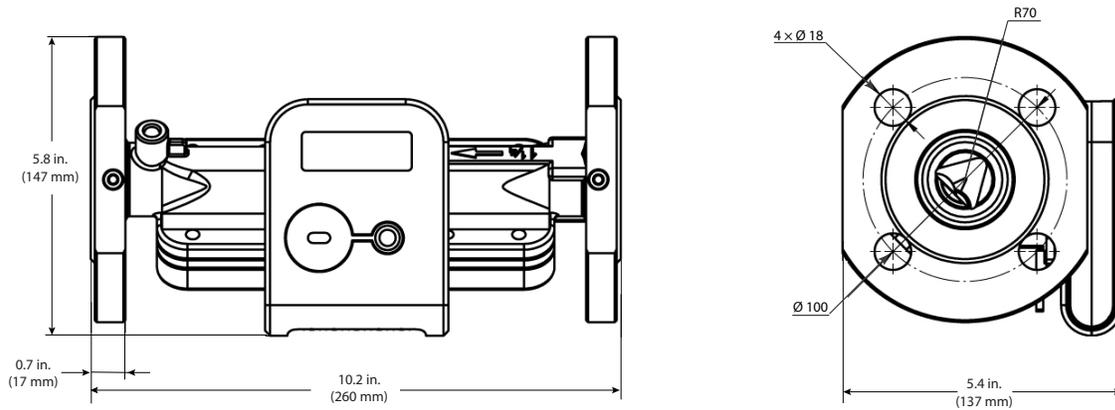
Flow sensor $q_p = 3.5/6.0 \text{ m}^3/\text{h}$; $L=260 \text{ mm}$; connection type: flanges DN32
